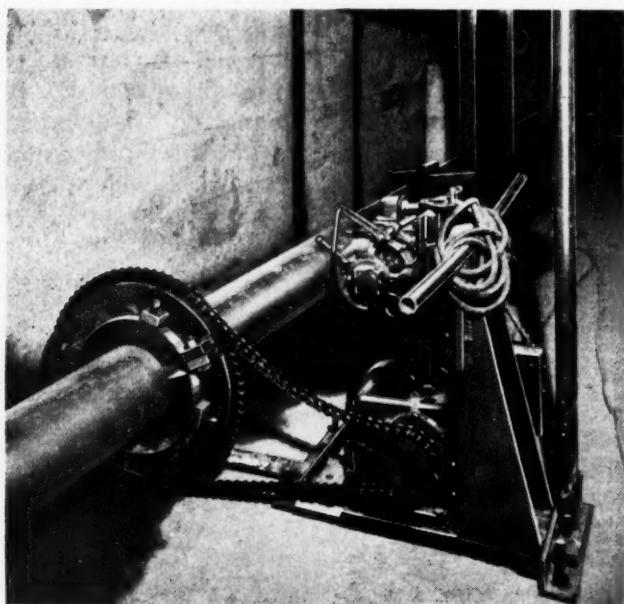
Method of Rotating a 14-inch Steam Pipe when Welding
